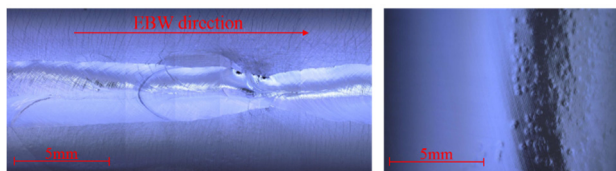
Welding bead at repaired position observed from inside(left) and strange defects(right).
